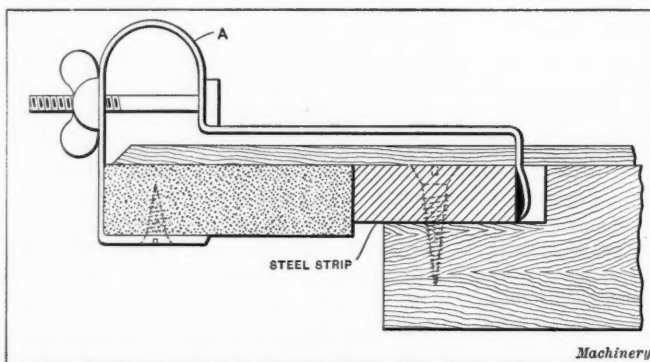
T-square held by Pressure of Clamp Spring on Steel Strip
